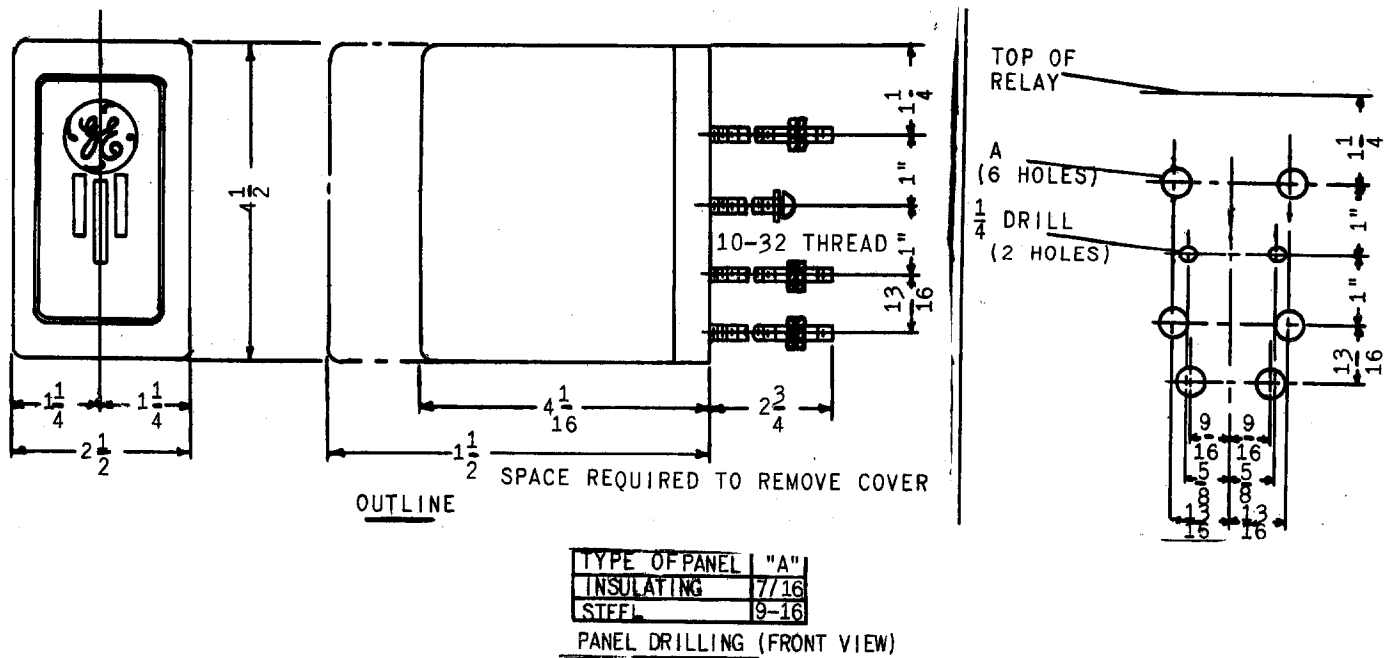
(6400409-2) Outline and Panel Drilling for Surface Mounting of HGA17F Relay.
